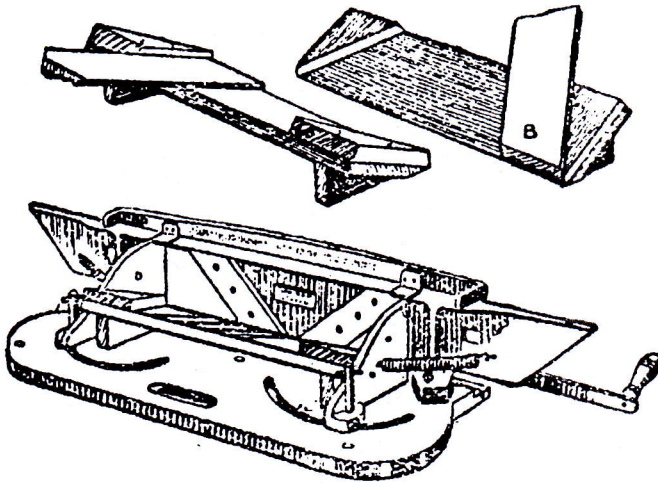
TRIMMER WITH JIG FOR MITREING CROWN MOULDINGS. TWO SEPARATE VIEWS OF JIG ARE SHOWN.
